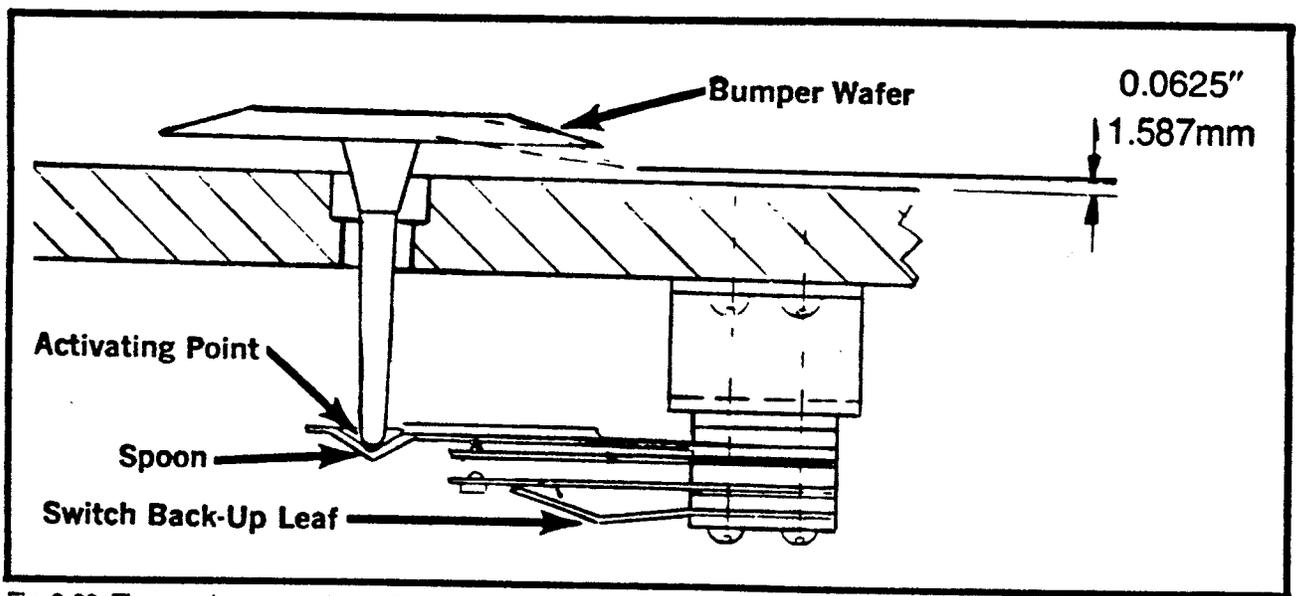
Thumper bumper switch adjustment. First center the switch spoon. Then bend the switch actuator to operate the switch within the specifications shown.
